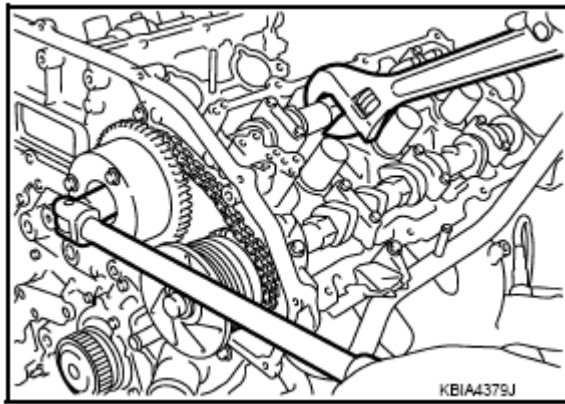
Removing Camshaft Sprocket Bolts Using Tool
